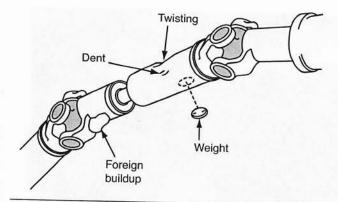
Points to inspect when checking a driveshaft for twisting, dents, missing weights, and buildup of foreign material.
